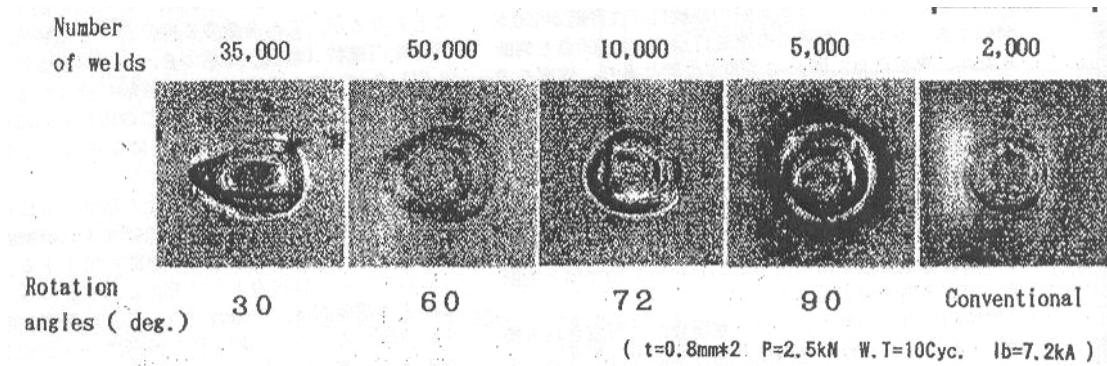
Weld peel buttons for varying electrode rotation angles at corresponding weld number [27]
